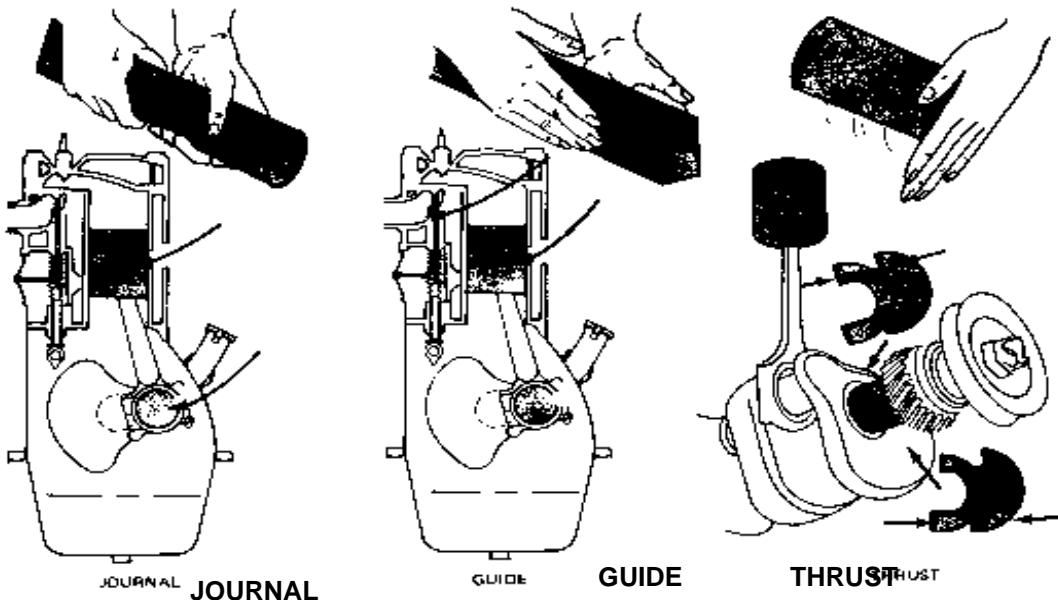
Three Types of Friction-Bearing Surfaces In an Automobile Engine
